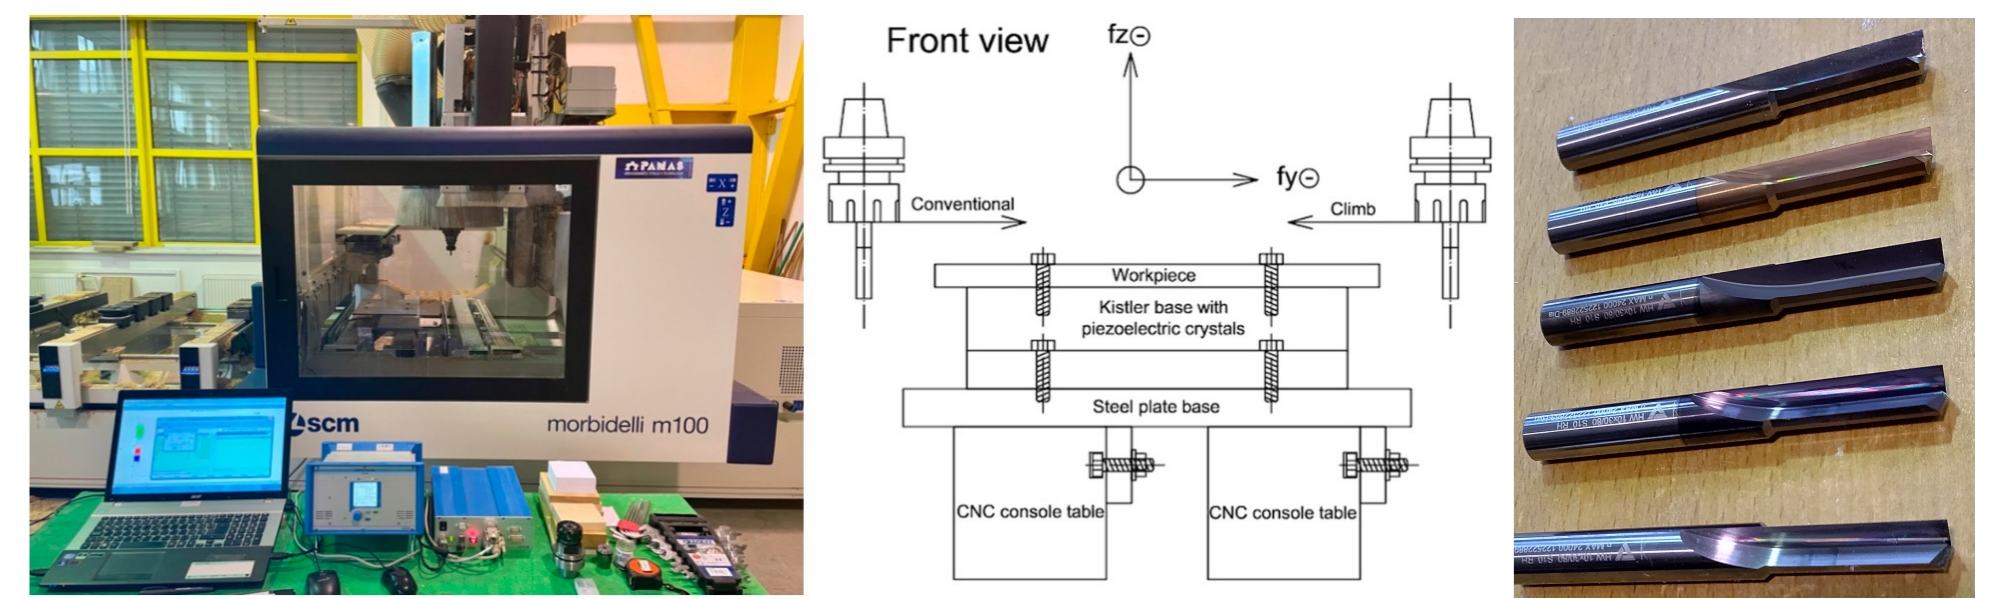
CNC milling machine and measuring chain; measuring set-up; cutting tools
